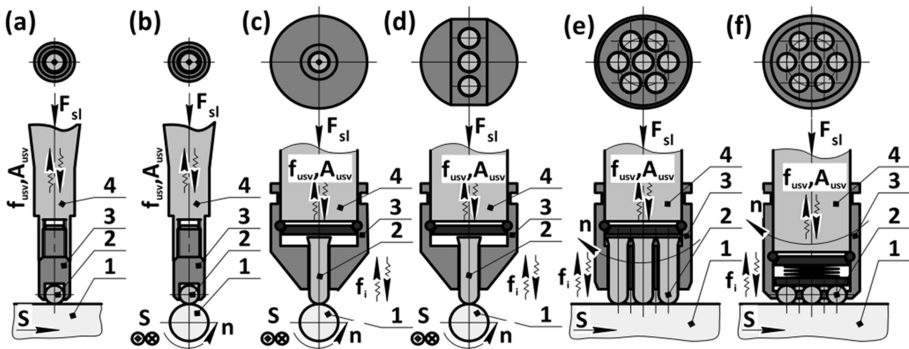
Kinematic schemes of UIT of the flat (a, e, f) and cylindrical (b–d) surfaces using mono-pin and multi-pin head: 1 – part, 2 – pin(s), 3 – head, 4 – horn.
